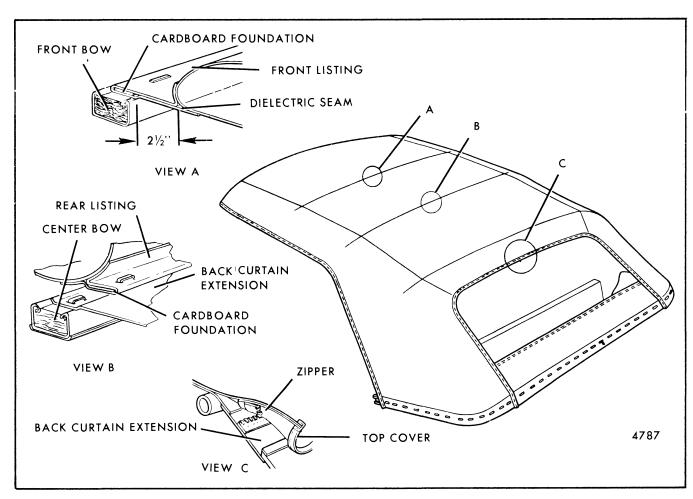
Top Cover Attachment At Front And Center Roof Bows
